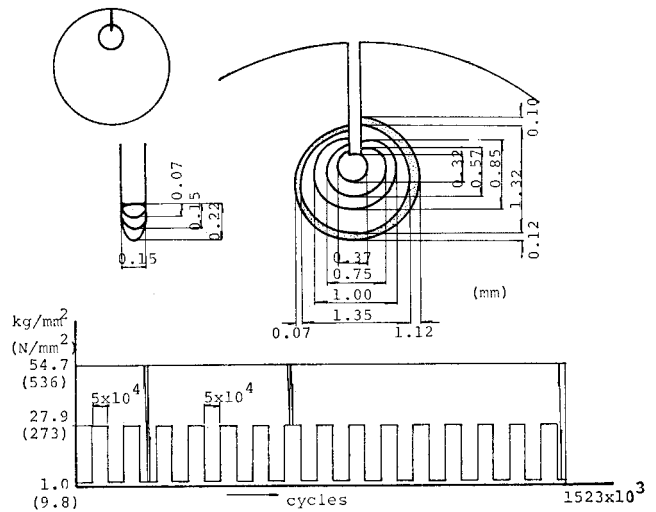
Beach Mark Test Results of W-25 Test Piece.
